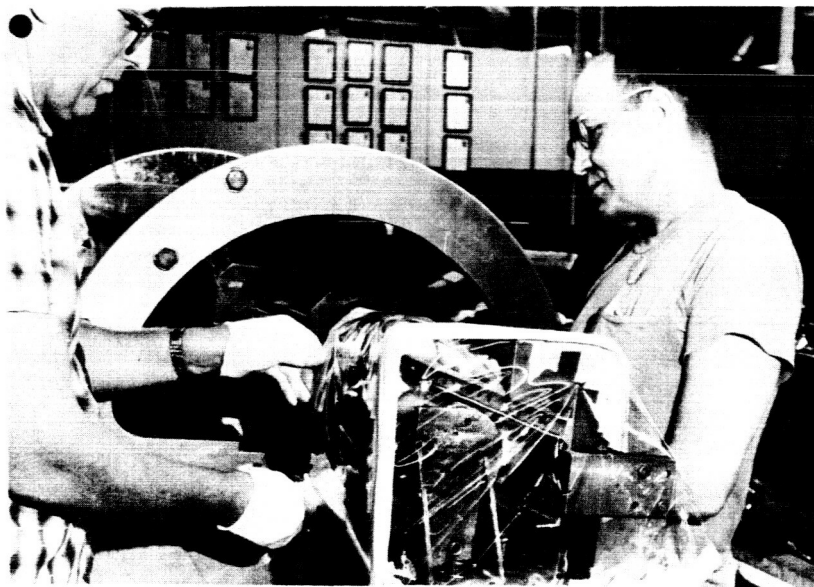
FLEXIBLE INERT-GAS-SHIELDING CHAMBER (REF. 21)
